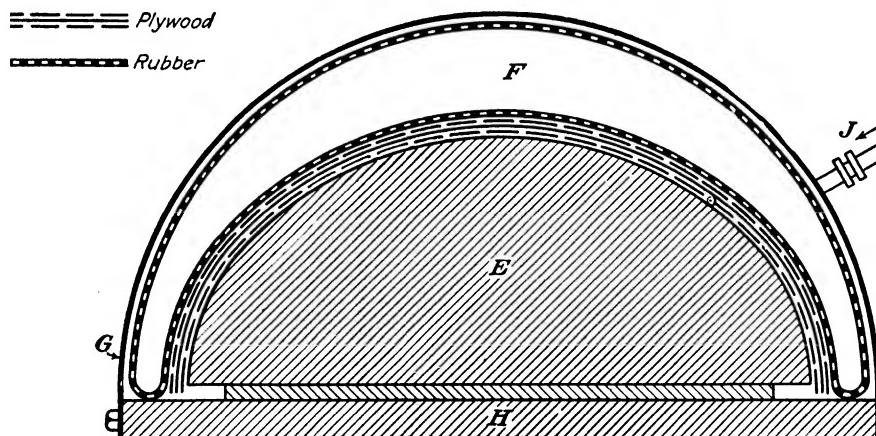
Molding a half fuselage by flexible-bag low-pressure molding technique. *E*, inside mold. *F*, rubber bag, inflated through inlet *J*. *G*, outer steel shell, bolted to base *H*. (Courtesy of Resinous Products and Chemical Co.)
